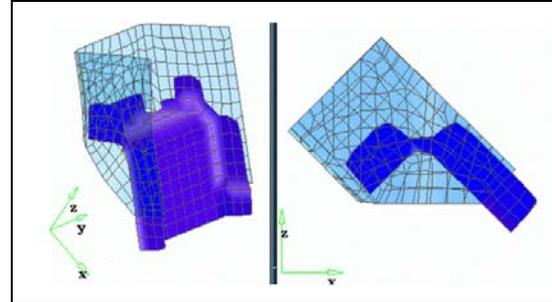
End stiffener and bulkhead re-designed after considering manufacturability.
